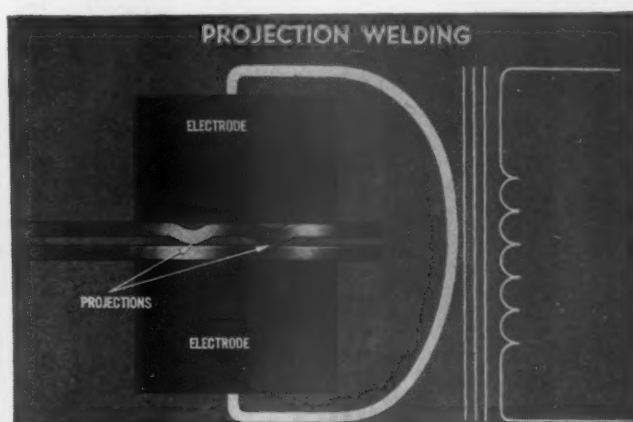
Projection welding is particularly useful where the thickness of pieces being joined vary greatly
